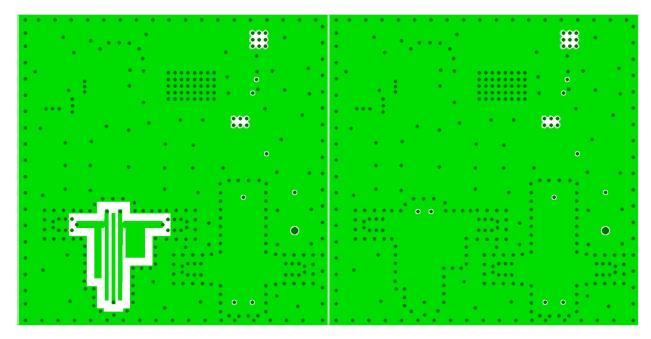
LH Layer 3 board 2; RH Layer 4 board 2
